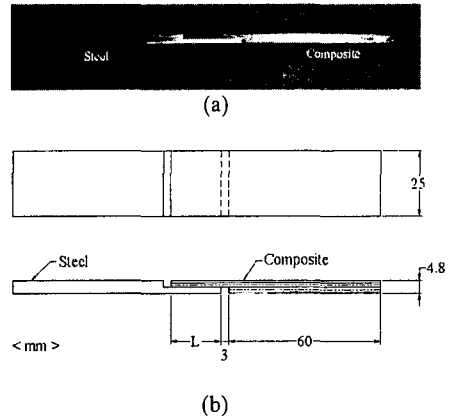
Co-cured single lap joint specimen. (a) Photograph of the specimen; (b) shape and dimensions of the specimen
